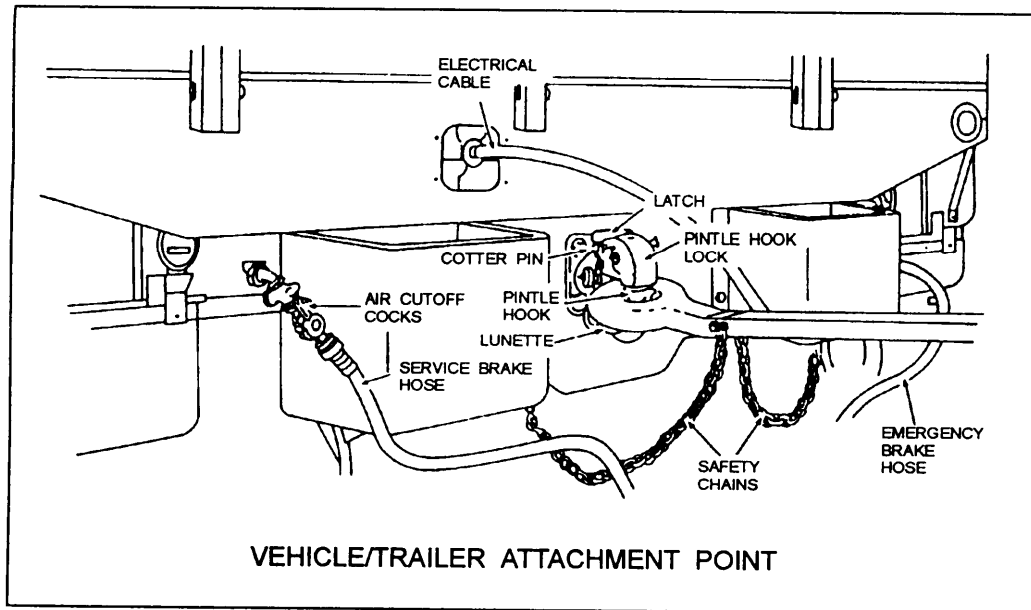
Vehicle trailer hookup with glad hand cutoff cock.
